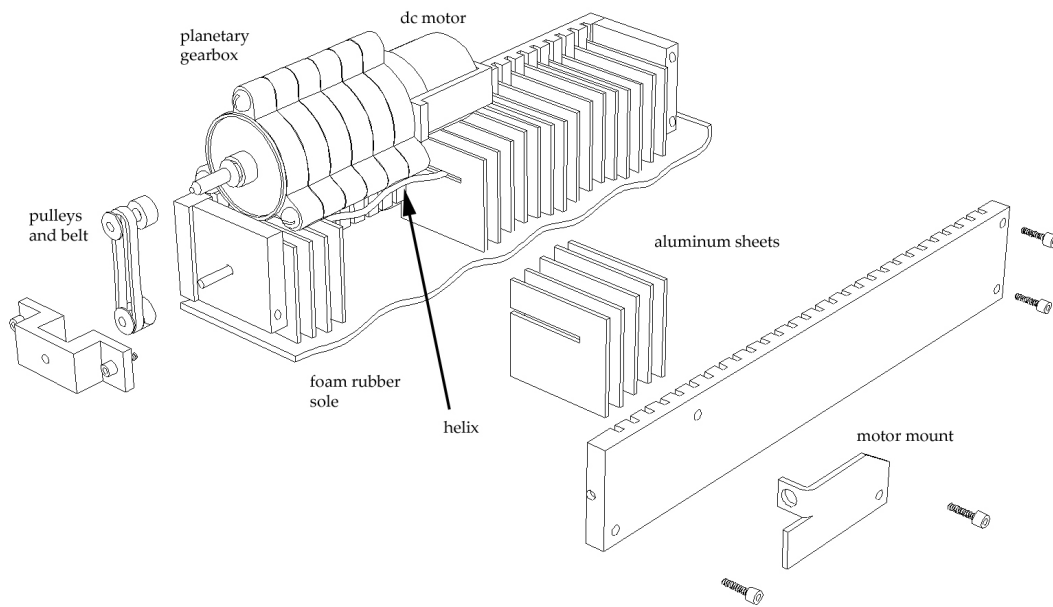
Partially exploded view of Robosnail 1 showing motor/gearbox assembly, rotating helix, slot plates, and membrane.
